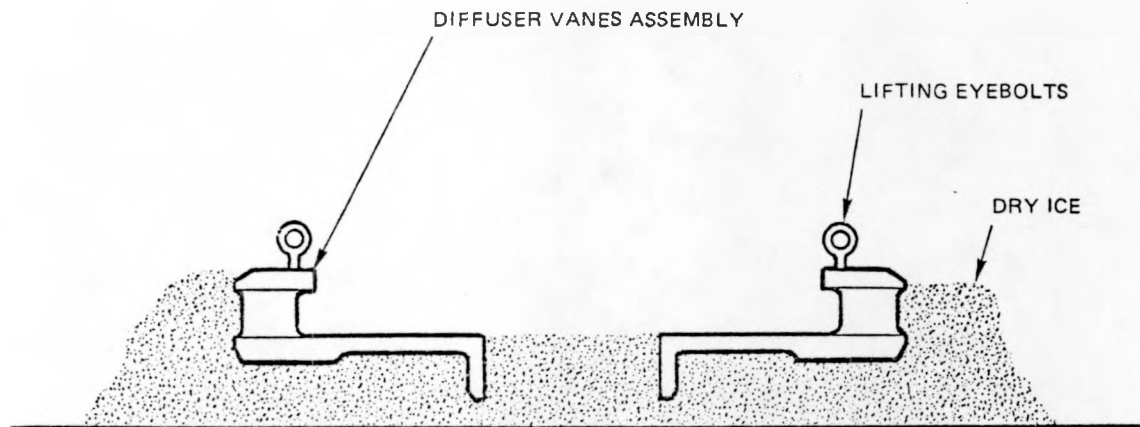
DIFFUSER VANES ASSEMBLY PACKED IN DRY ICE
